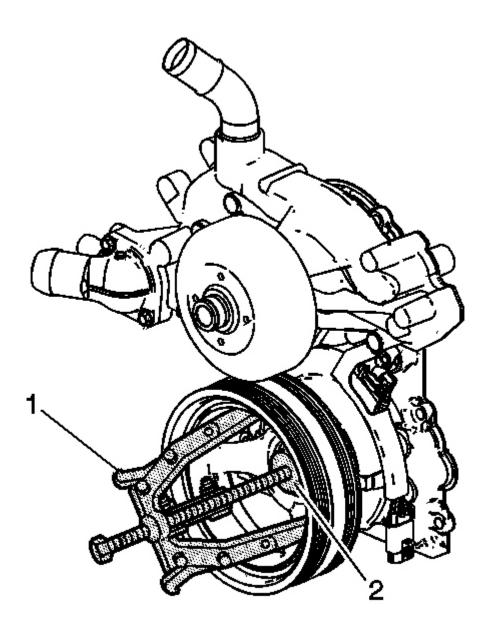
Removing Crankshaft Balancer Courtesy of GENERAL MOTORS CORP.
